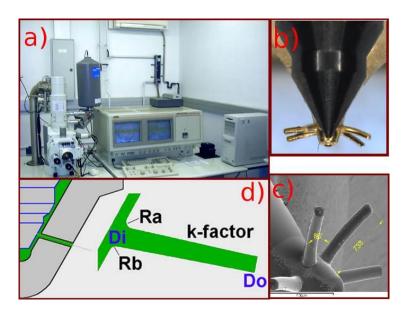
Nozzle geometry determination by the silicone molding technique.
